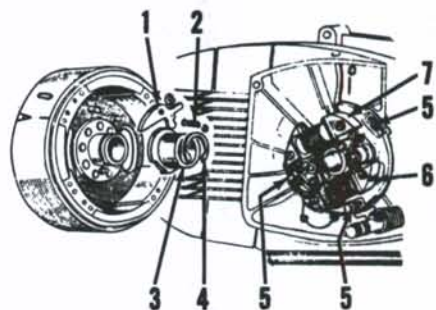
View of the ignition and generator with flywheel removed. Make certain that ignition advance (1, 2 & 3) operates freely.
